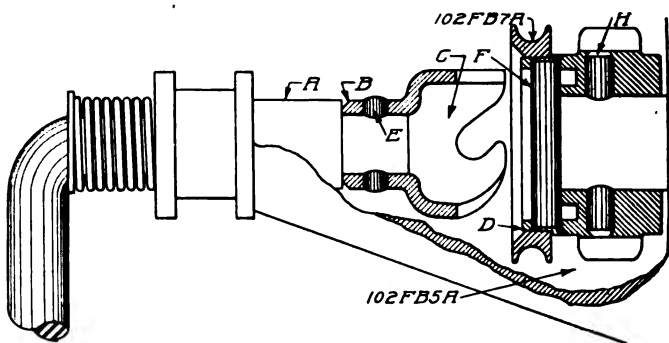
Crankshaft Pin and Sprocket on Fisher Ford Installation
